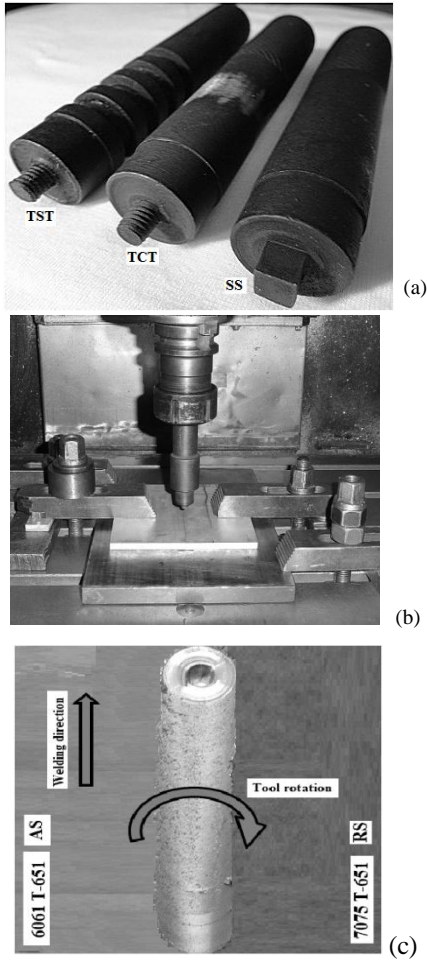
(a) Tool pin profiles, (b) FSW set up, (c) Typical welded plate by FSW process
